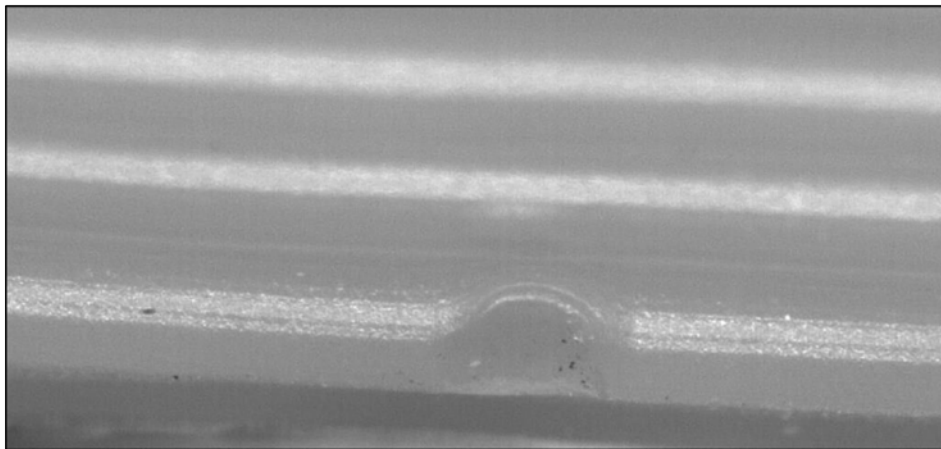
Possible filament void bubble in the extruder plate specimen G002.
